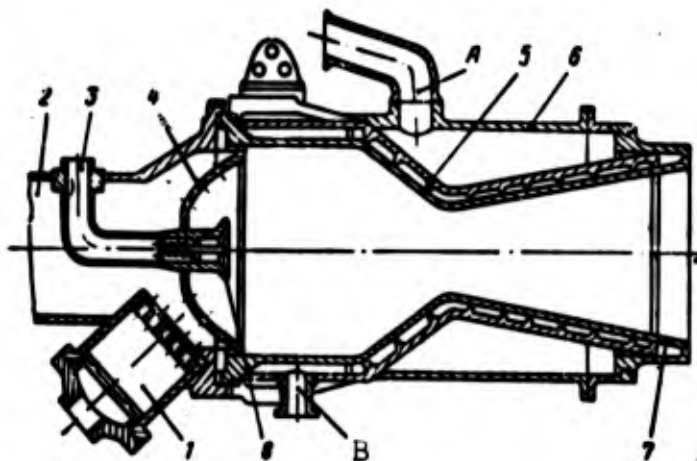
Chamber of liquid propellant rocket engine with liquid-gas phase head with windows: A and B - coolant in and coolant out; 1 - catalyst chamber; 2 - discharge of steam gas from turbopump assembly; 3 - supply of combustible; 4 - window for supply of steam gas; 5 - outer wall of chamber; 6 - chamber housing; 7 - inner wall of chamber; 8 - gear-like injector of combustible.
